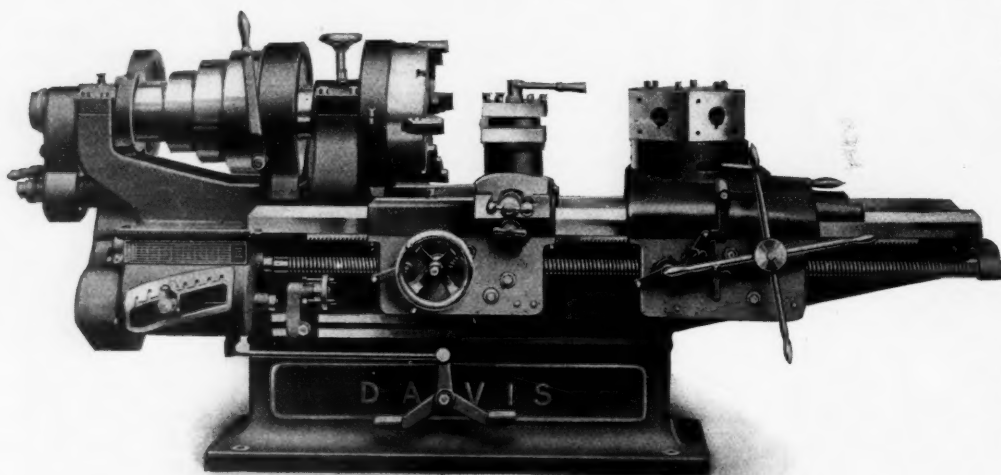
Davis 26-inch Turret Boring, Forming and Turning Lathe
